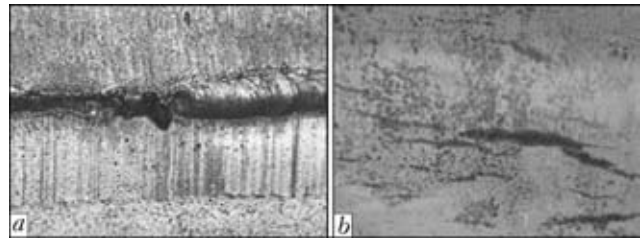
Kinds of defects: *a* – joining defects in the weld root (pipe $D = 1000$ mm, $s = 16$ mm); *b* – crack-like defect of 1.5–4.0 mm length (pipe $D = 10000$ mm, $s = 14$ mm)
